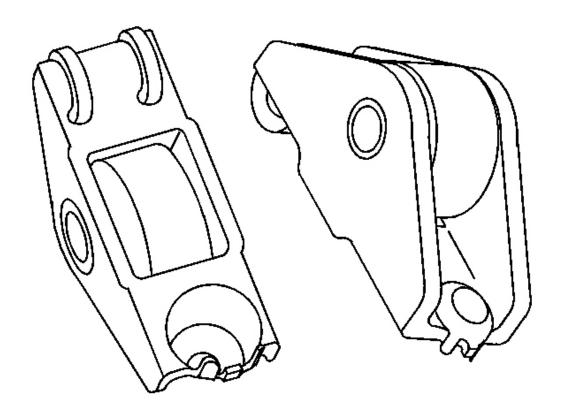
View Of Valve Rocker Arm Courtesy of GENERAL MOTORS CORP.
